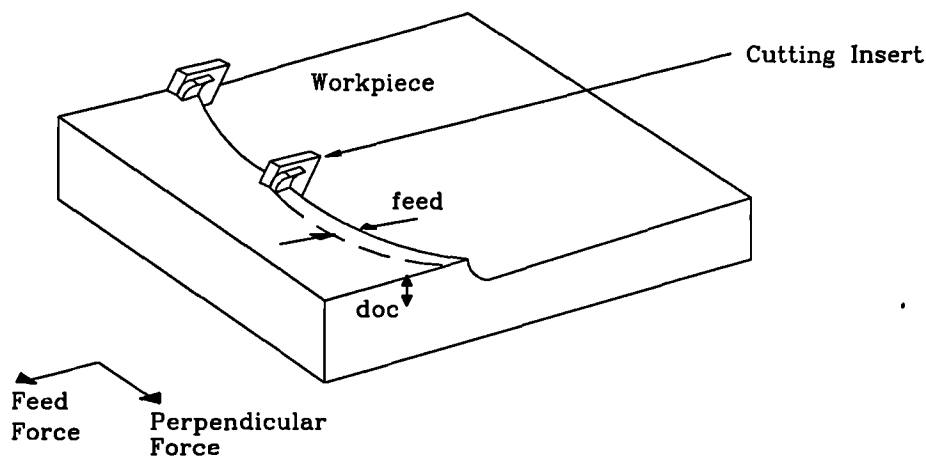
Schematic of the Face Milling Operation with a Large Tool
